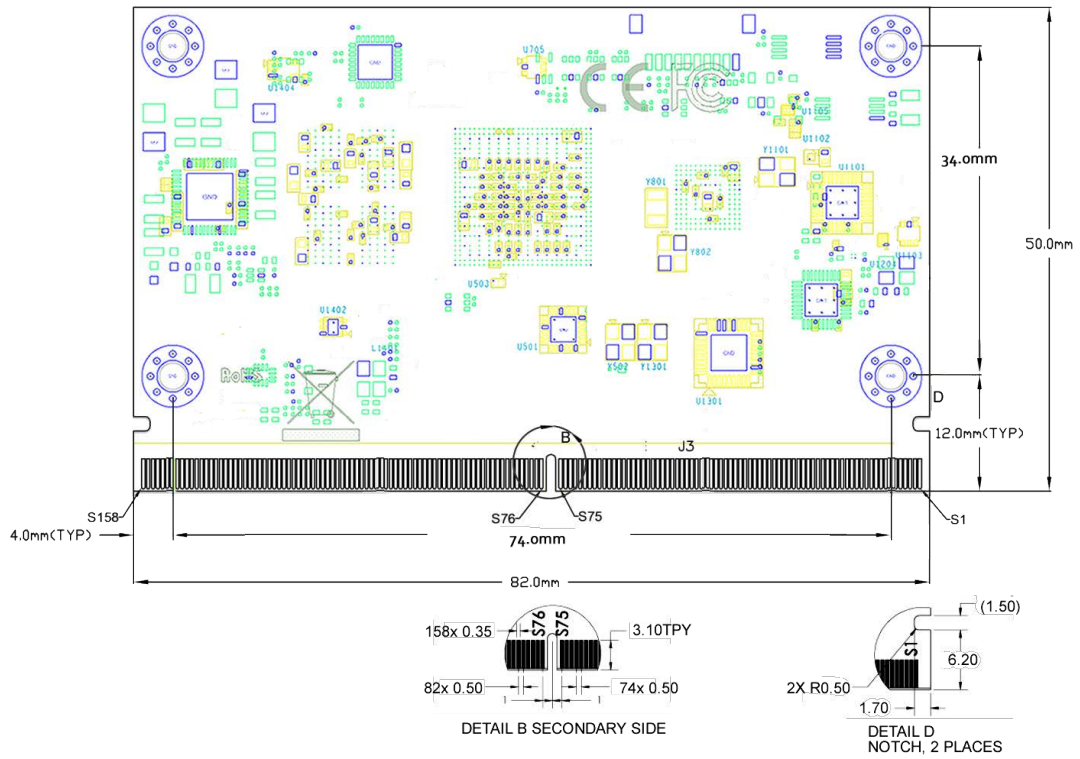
SMARC-iMX8MP Mechanical Drawings (Bottom View)
